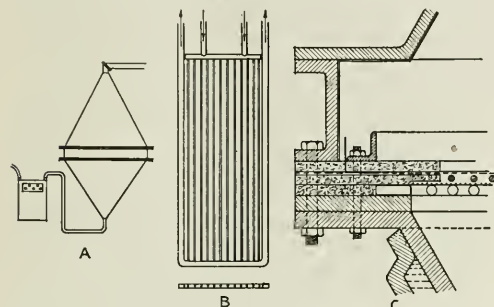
A. GENERAL ASSEMBLY. B. COPPER WATER COOLER. C. DETAIL OF ASSEMBLY
